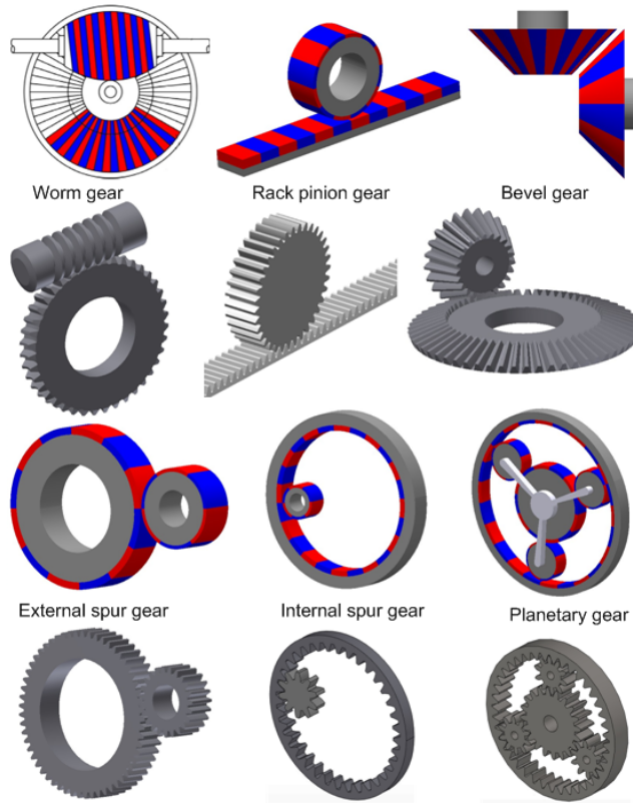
Mechanical gears and their corresponding MG counter parts [8].
